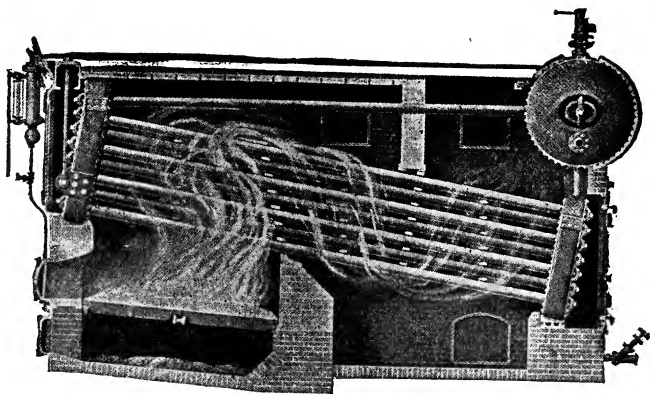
,689.—Keeler non-sectional transverse drum horizontal boiler. This type was developed to meet the demand for a high pressure water tube boiler that could be installed in boiler.
